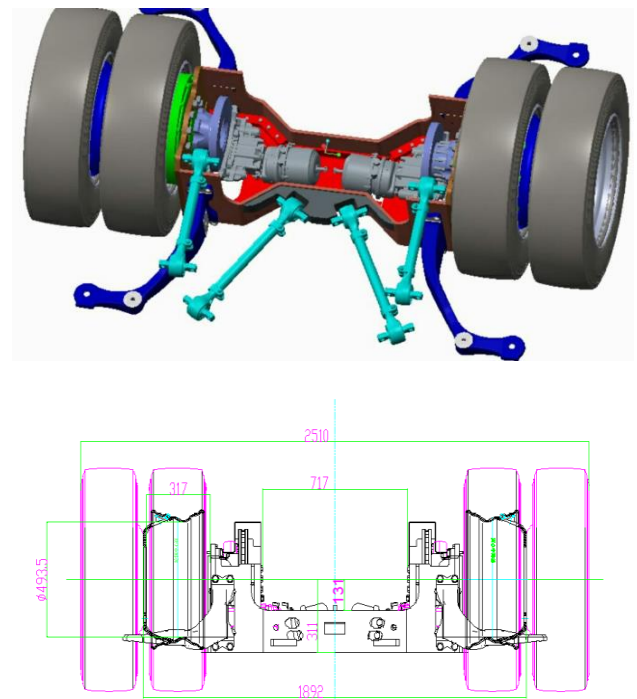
Structure of Electric Axle with an In-wheel Motor
